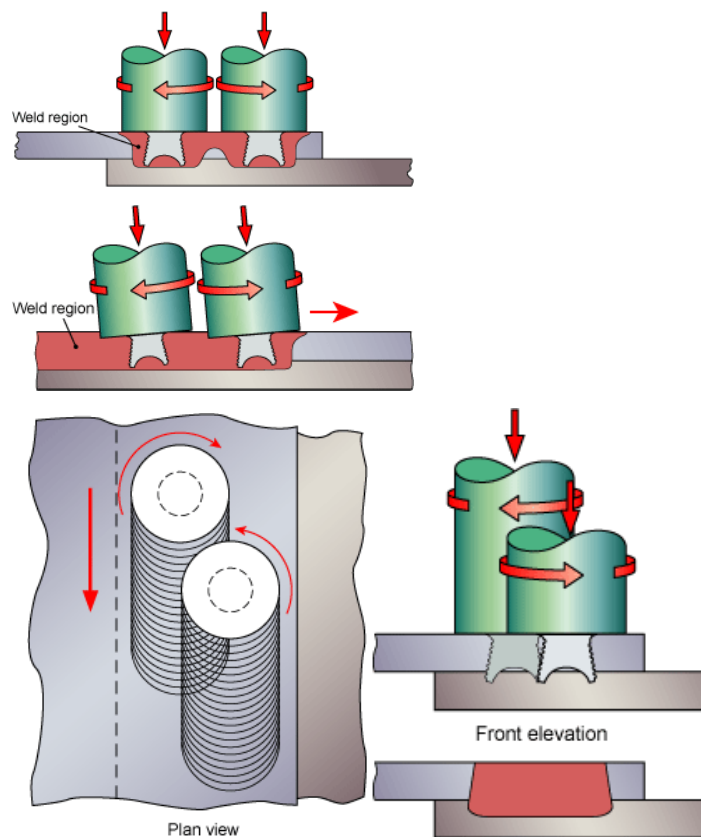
a) Parallel side-by-side transverse to the welding direction, b) Tandem in-line with the welding direction, c) Staggered to ensure the edges of the weld regions partially overlap (Thomas et al., 2005).
